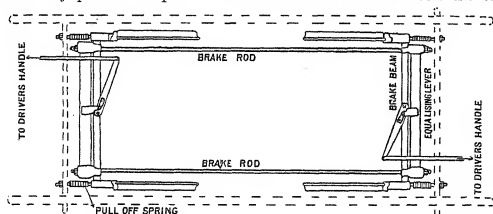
Arrangement of brake gear on Preston No. 21 E truck.
